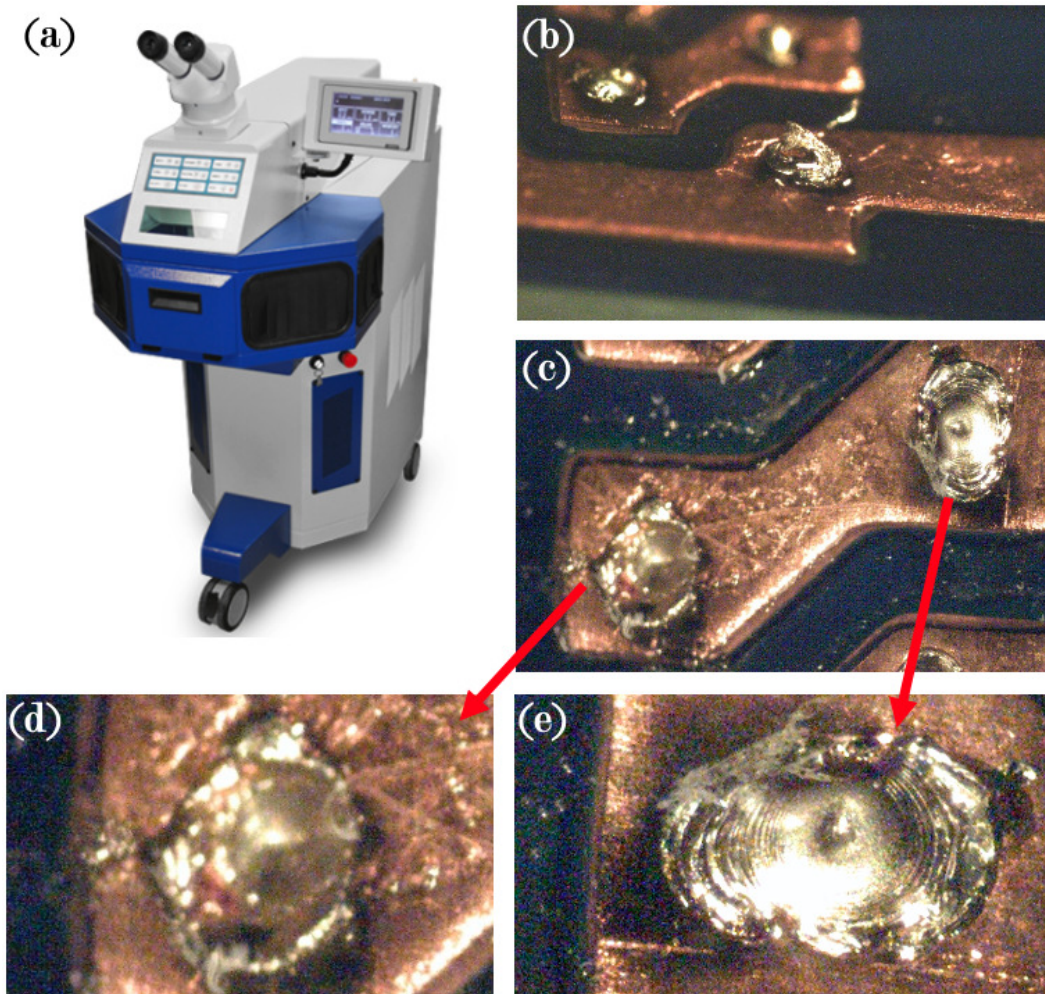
Laser welder utilized to weld the nichrome wires of the improved TMFM design. (a) 6V-laser welder by Z-Tech Advanced Technologies used to weld the nichrome wires to the PCBs. (b) Side view of a cold weld. (c) View of two welds showing a weld missing material (d) and an optimal weld (e).
